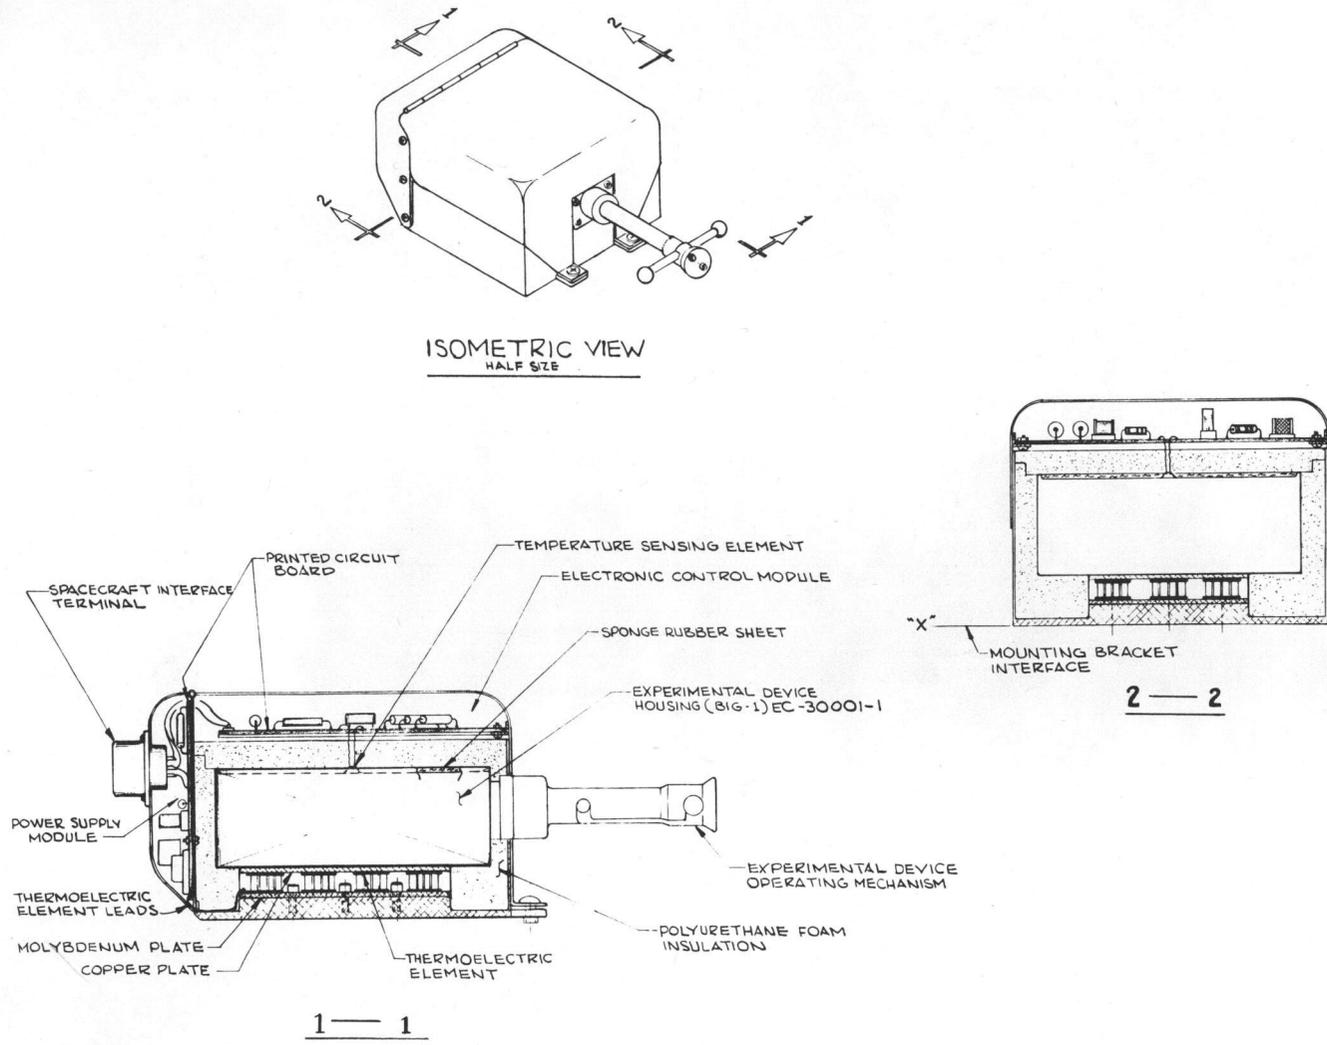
Drawing of S-4 Refrigerator Unit Showing Location of Circuit Boards and Other Components.
